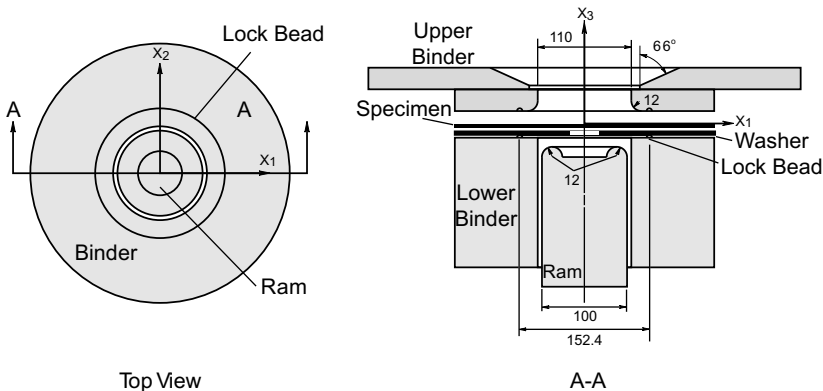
Marciniak tooling (dimensions shown in mm) with specimen inserted in cross-section view (right).
